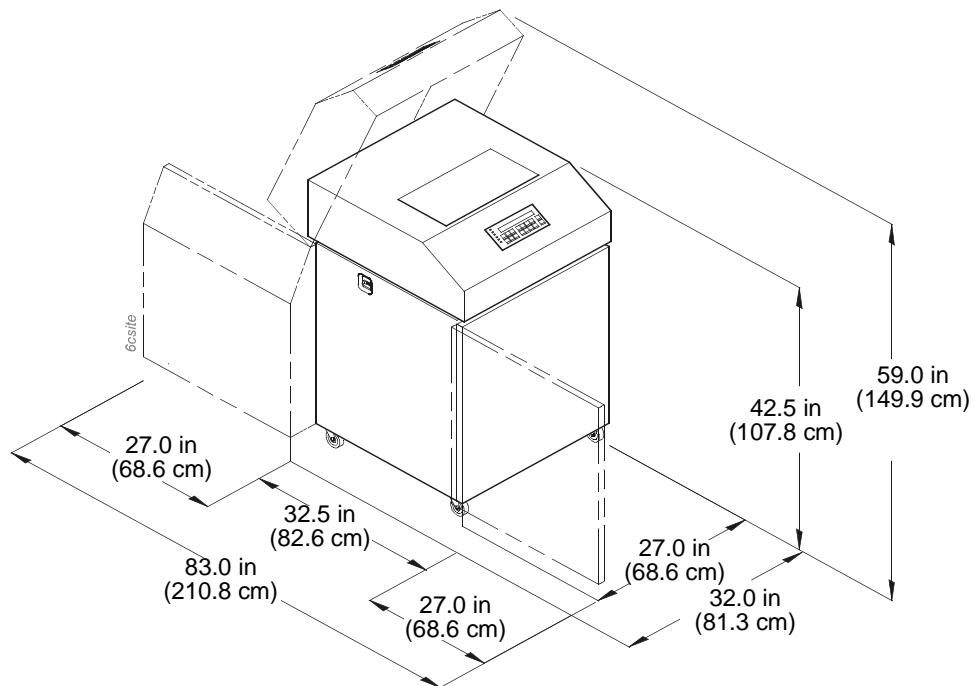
Exploded View Of Cabinet Model With Power Paper Stack Printer Dimensions
